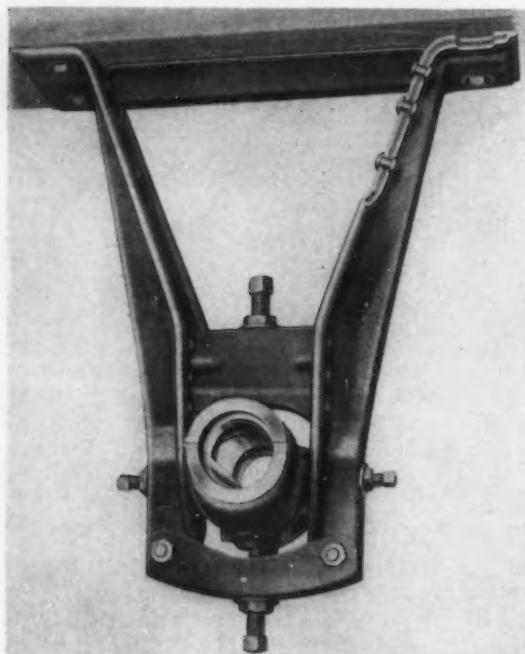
Standard Pressed Steel Co. pressed steel hanger with shaft bearing adjustable four ways.
